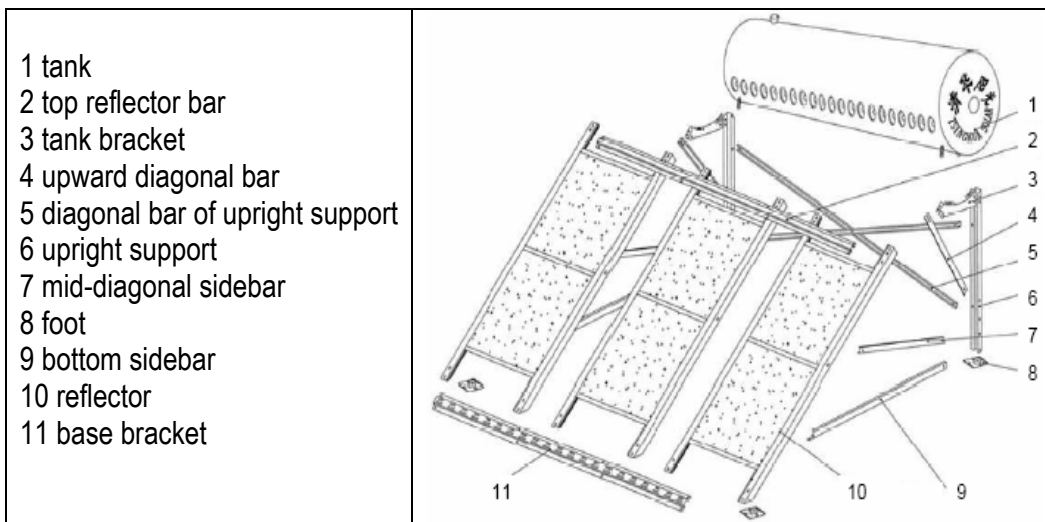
Assembly of the unit (the collector tilt angle is 30° and 45° respectively)
